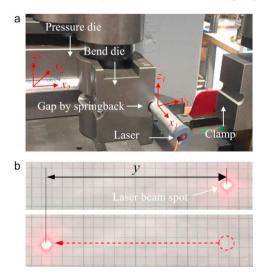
(a) a laser device after springback; (b) beam travel on a datum board
